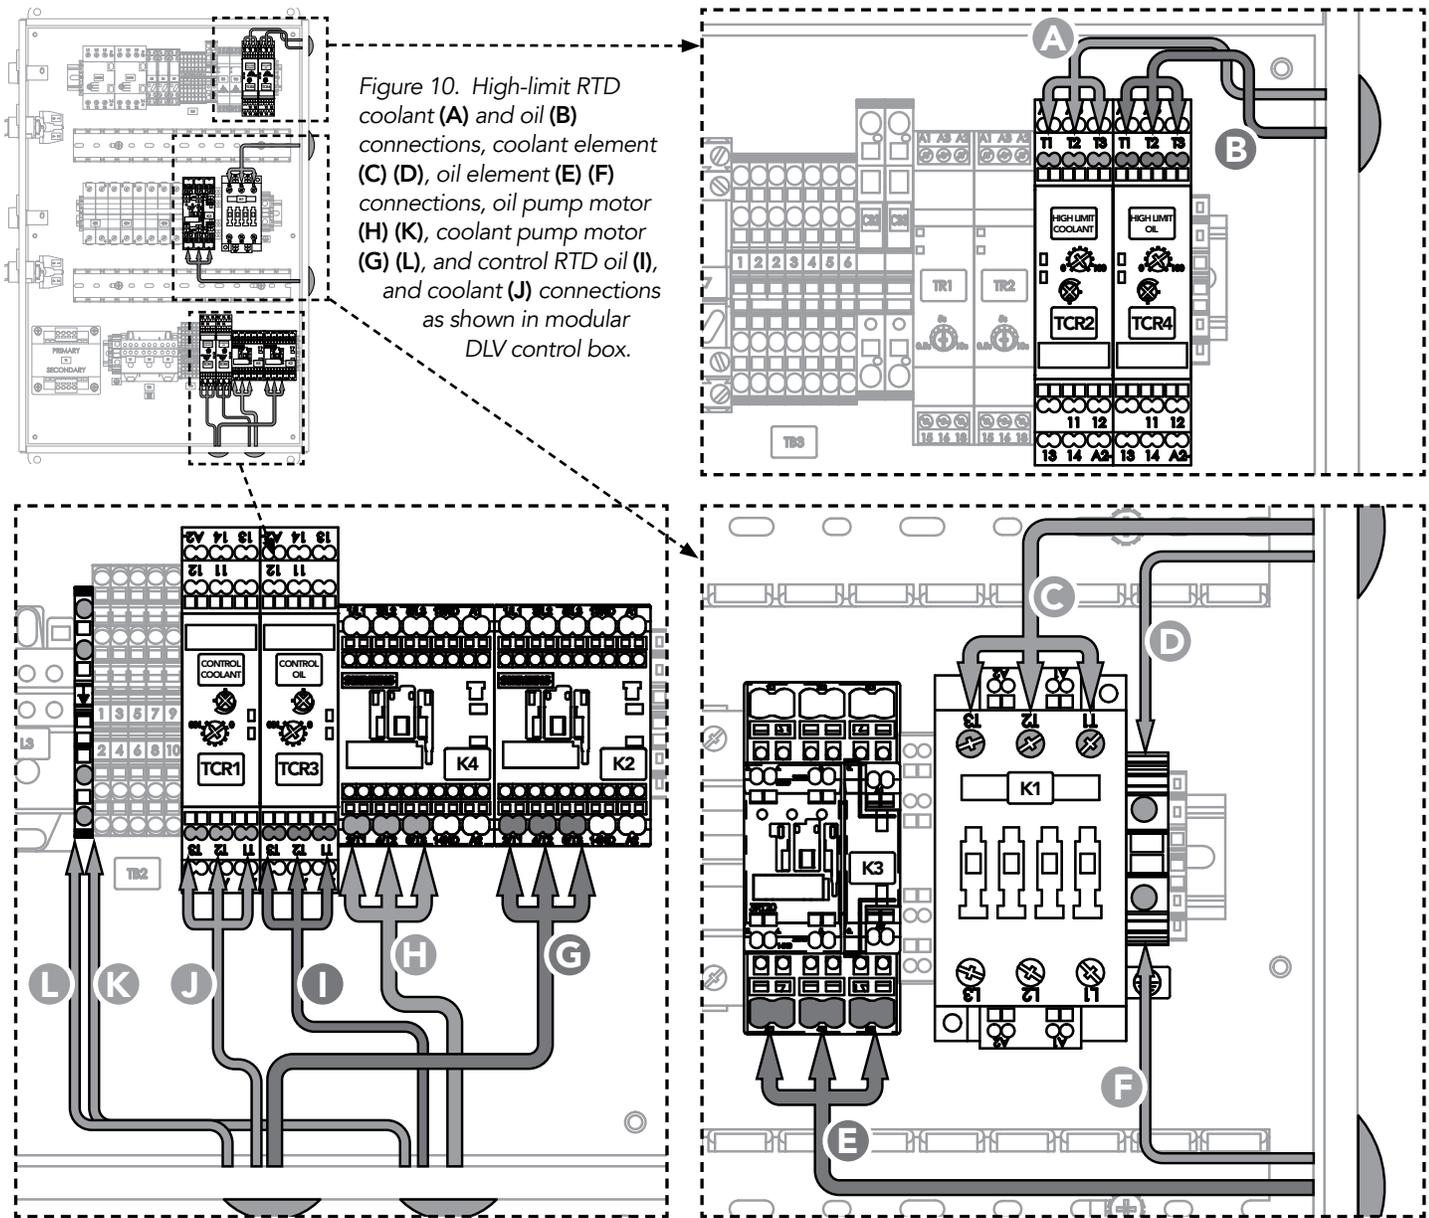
High-limit RTD coolant (A) and oil (B) connections, coolant element (C) (D), oil element (E) (F) connections, oil pump motor (G) (K), coolant pump motor (H) (L), and control RTD oil (I), and coolant (J) connections as shown in modular DLV control box.
